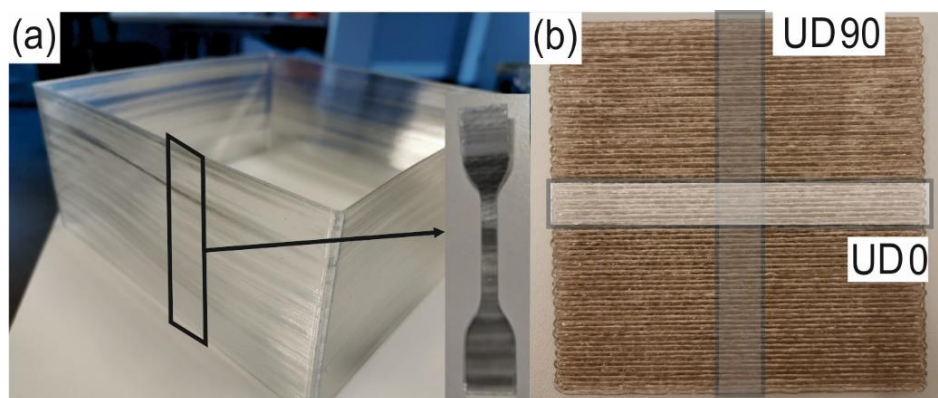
Printed PLA box and specimen for mechanical testing (a) as well as printed flax fiber reinforced PLA plate and UD0 / UD90 specimens (b)
